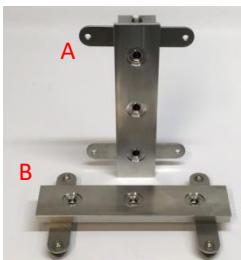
Flow adapter with mounting plates for horizontal mounting or placement on a surface
